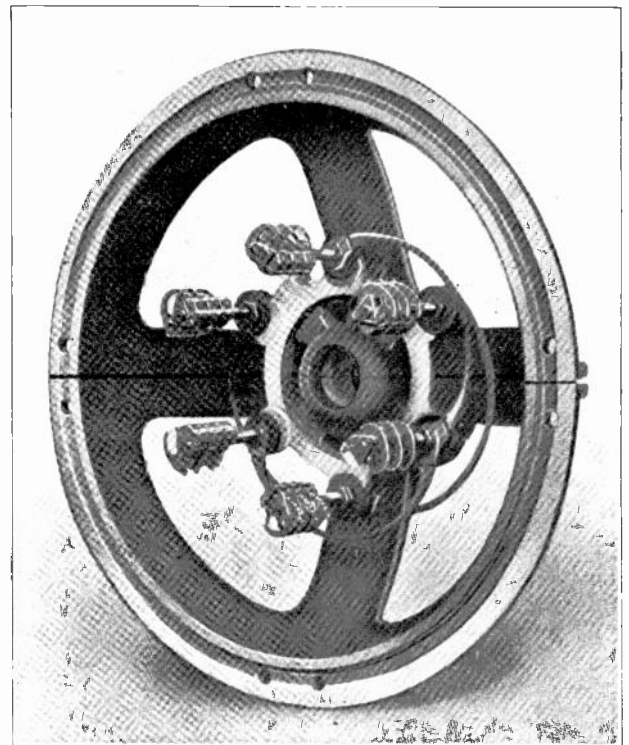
This view shows a complete set of brushes and holders mounted on the rocker arm, which in turn is fastened in the end bracket of the machine.
